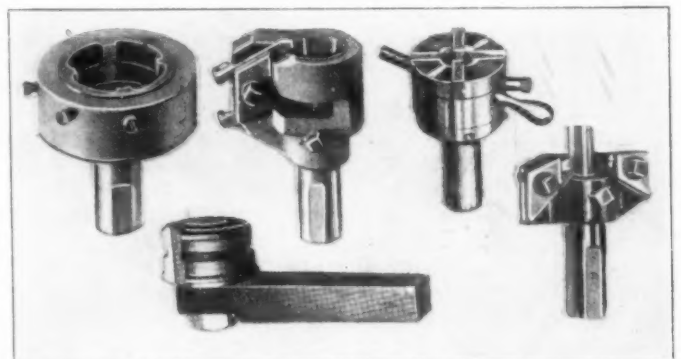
TOOLS USED IN THREADING MALE PLUG.
